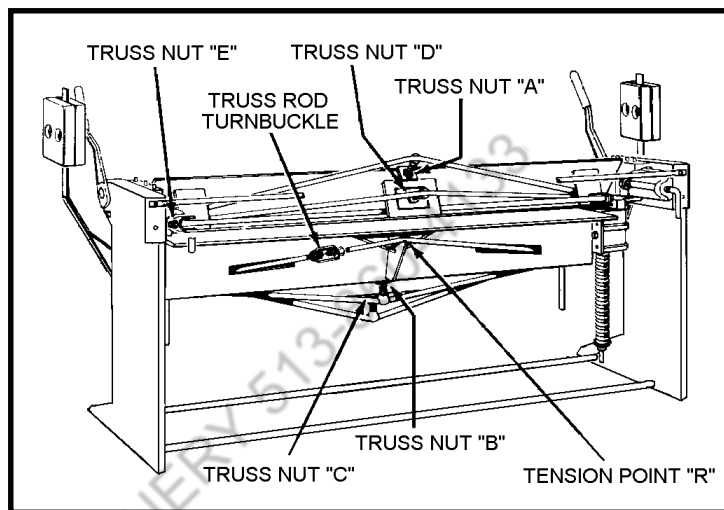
Rear View of Brake Showing Tension Adjustment Points
